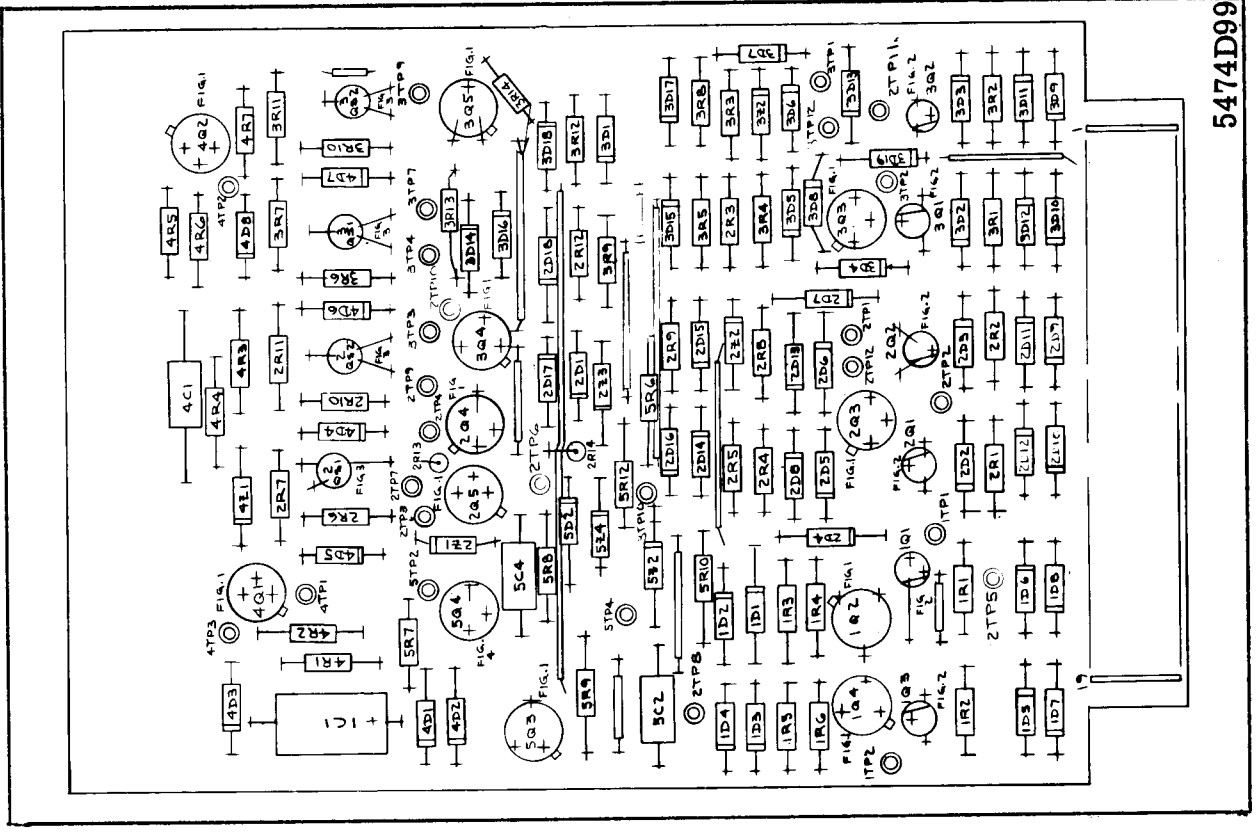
Printed Circuit Board Assembly for Type SP Relay with Single Output.
